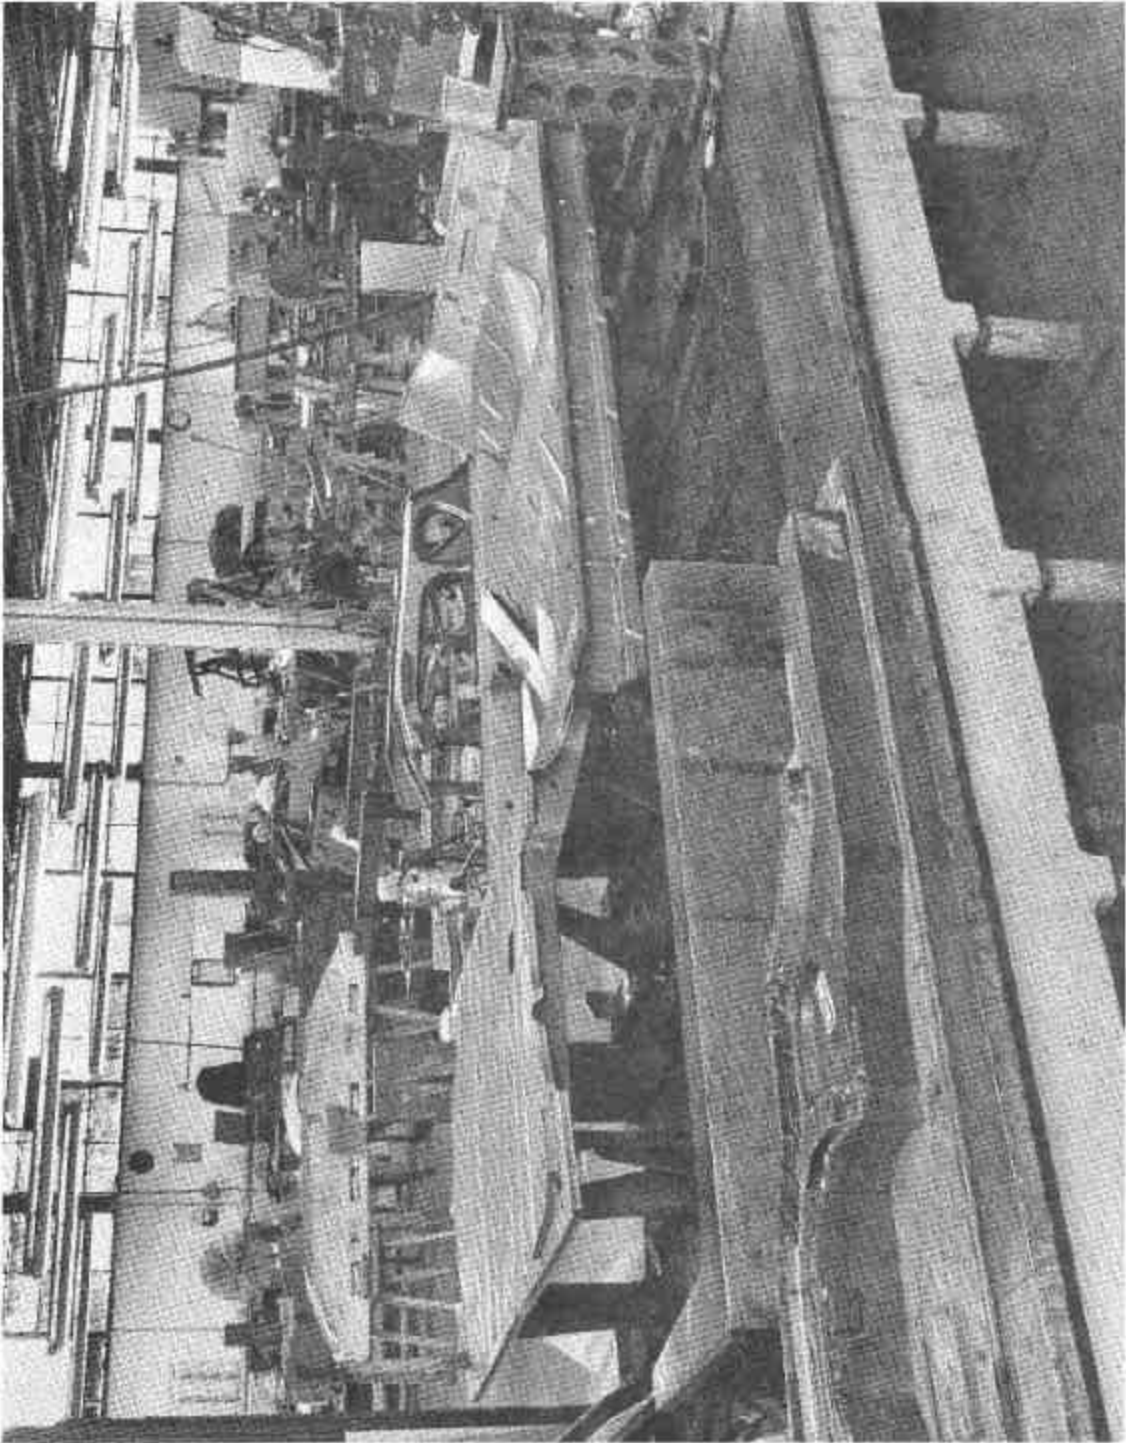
FLOOR PAN IN BODY ASSEMBLY FIXTURE
